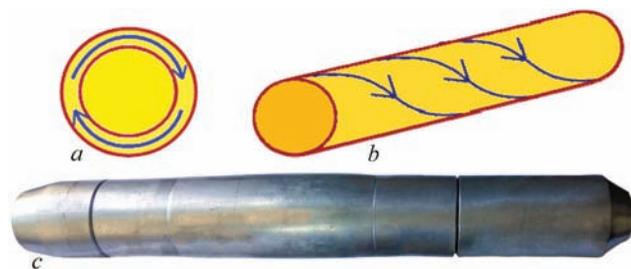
Direction of metal flow at screw rolling with application of helical texture: *a* — sample end view; *b* — general view of texture; *c* — test sample from aluminium
